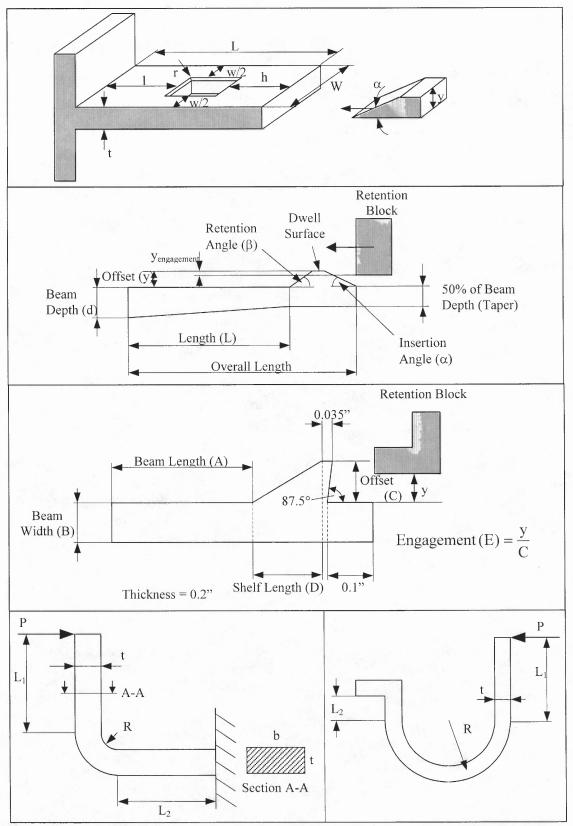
Cantilever-Hole Fastener, Cantilever Hook, Compressive Hook, L-Shaped Hook, and U-Shaped Hook
